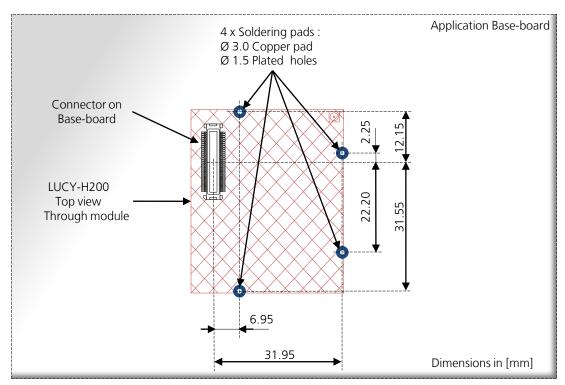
Coordinates of Plated Holes (PTH) on baseboard, for shields solder tabs
